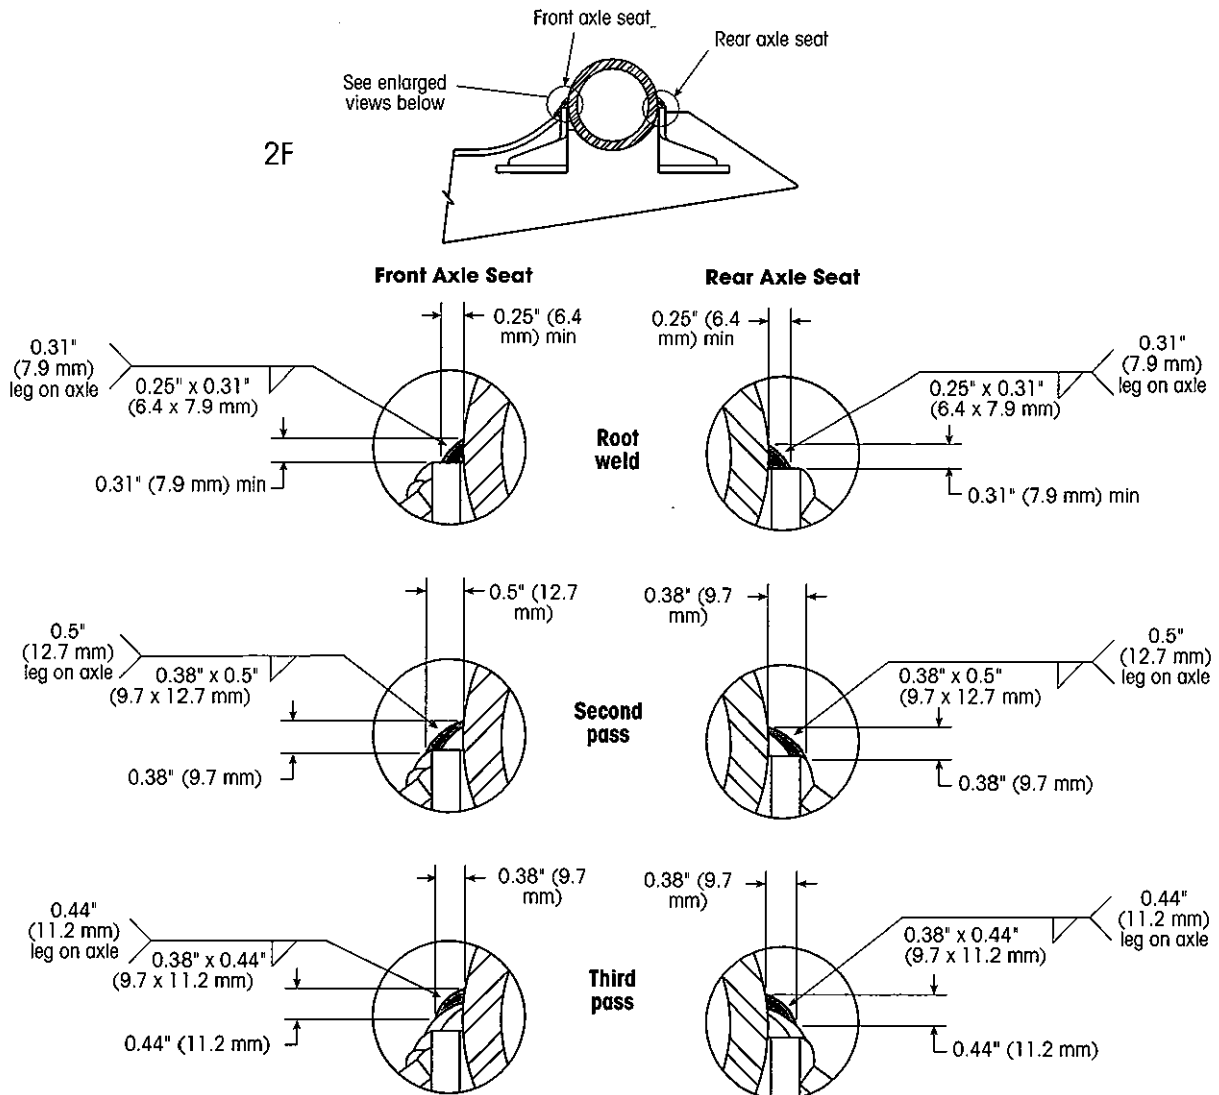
Axle weld passes — all HT™ Series suspensions
